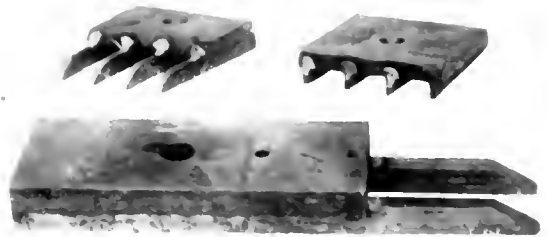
Stator Core Clamping Flanges and End Fingers Combined by Arc Welding
